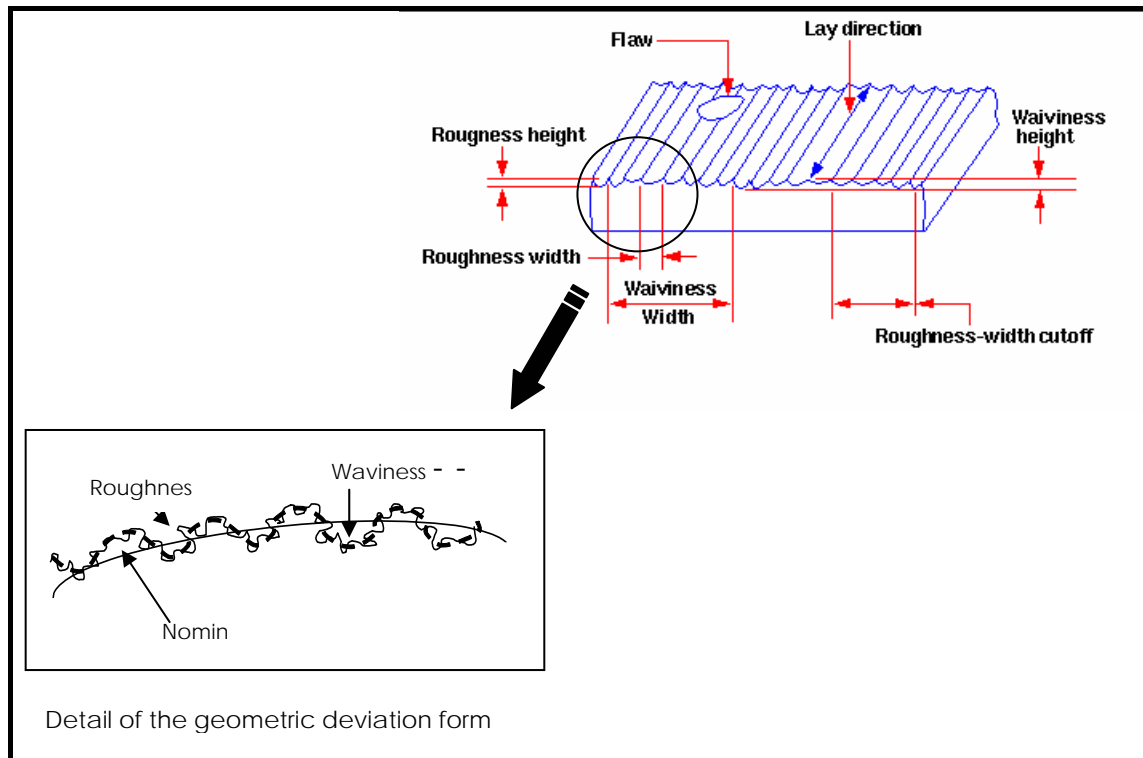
Details of a workpiece surface texture. Kalpakjian, 2003
